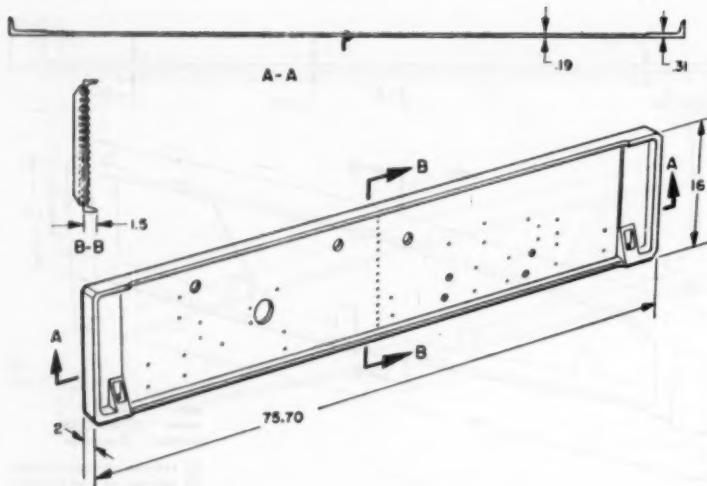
CONSTANT-SECTION SPAR FINISH-MACHINED PART
